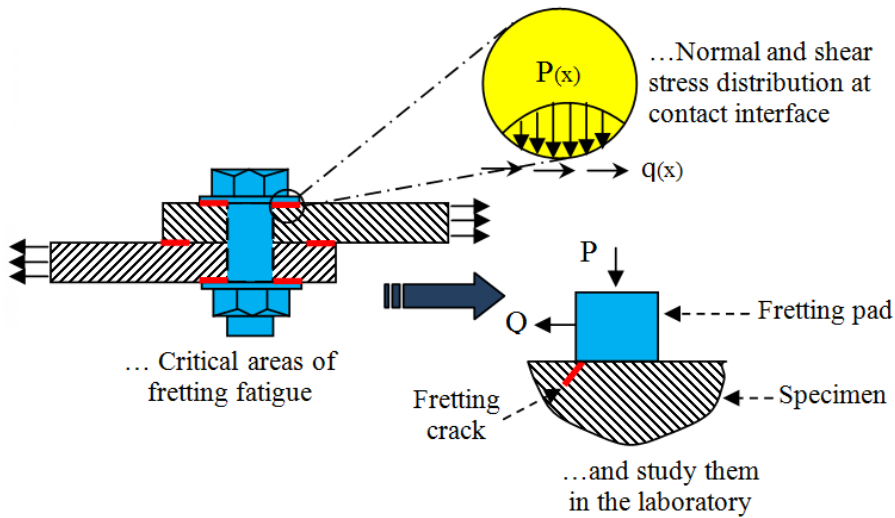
Schematic view of fretting fatigue problem in bolted connections
